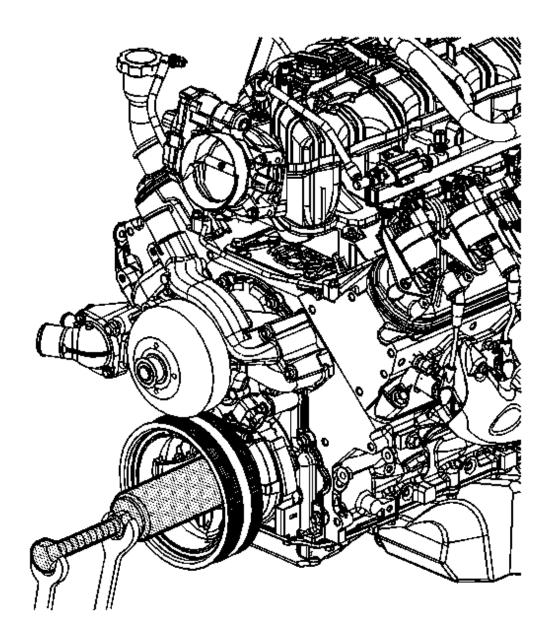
View Of Balancer Installation Special Tools Courtesy of GENERAL MOTORS CORP.
